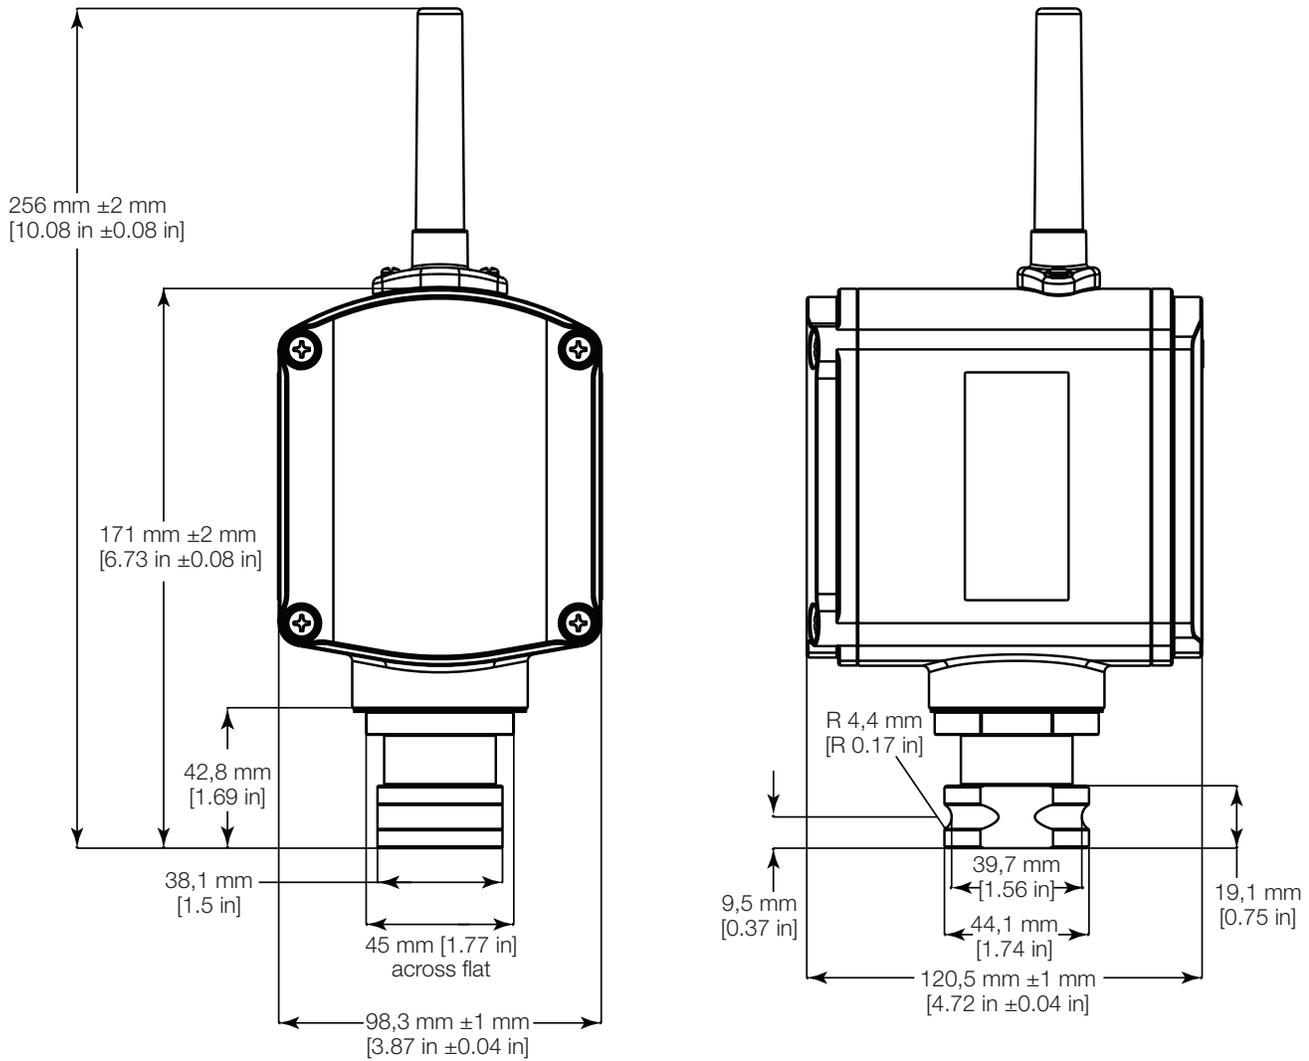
Dimensions of ISA100 Wireless Pressure Sensor, IS-WPS Series, Connection Type 1 & 2
